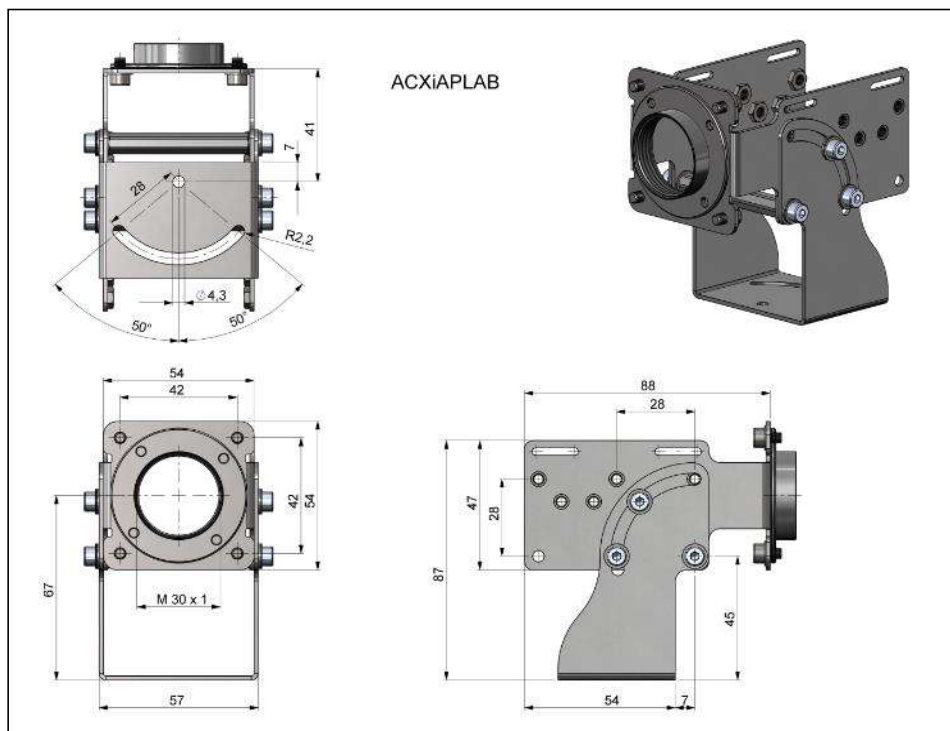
Mounting bracket (ACXIAPLAB), dimensions [mm], weight: 276 g
